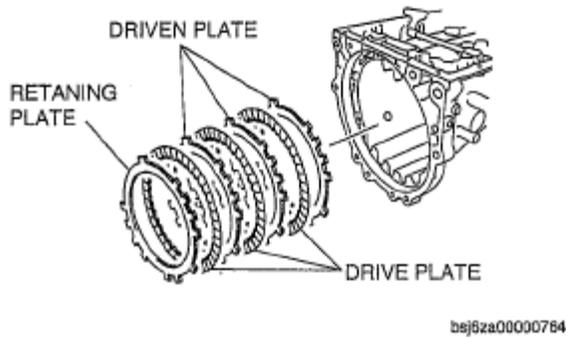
Identifying Retaining Plates, Drive And Driven Plates
